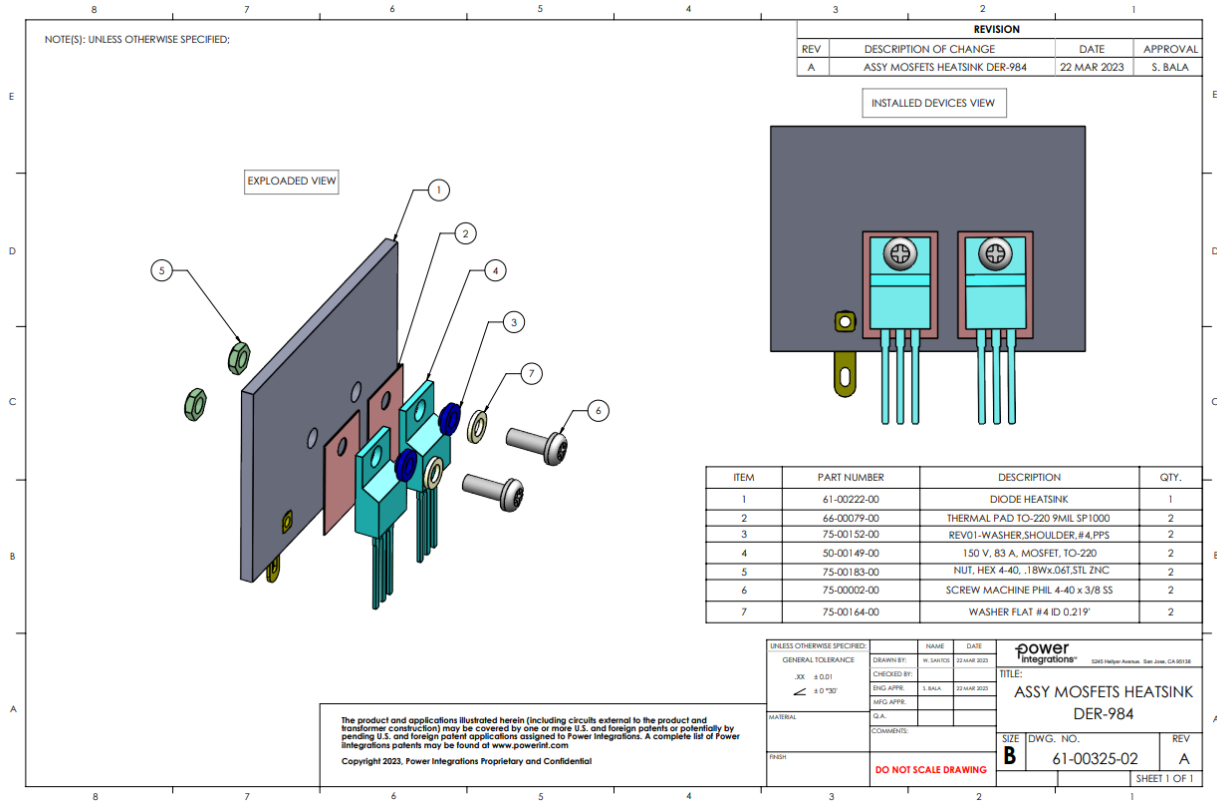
Synchronous MOSFET Heat Sink Assembly
